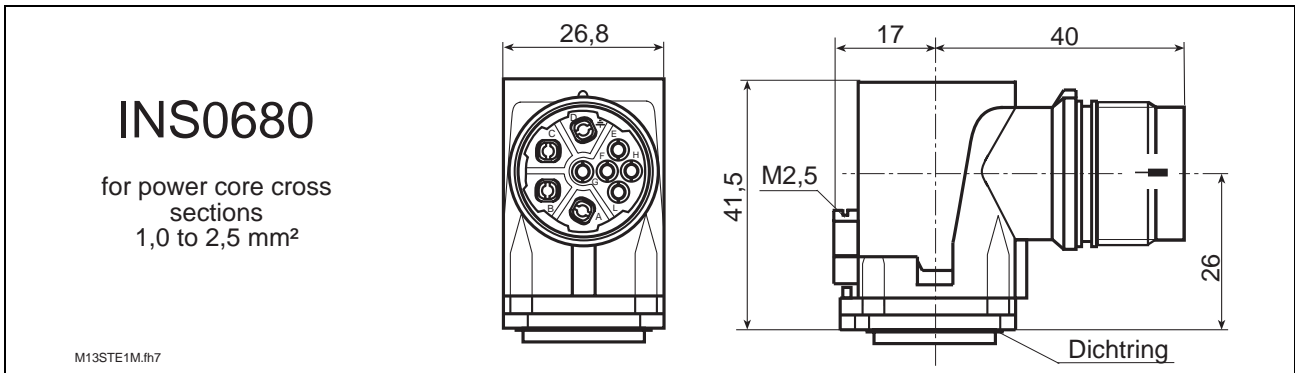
INS0680 Rotating angle - flanged socket with pins
